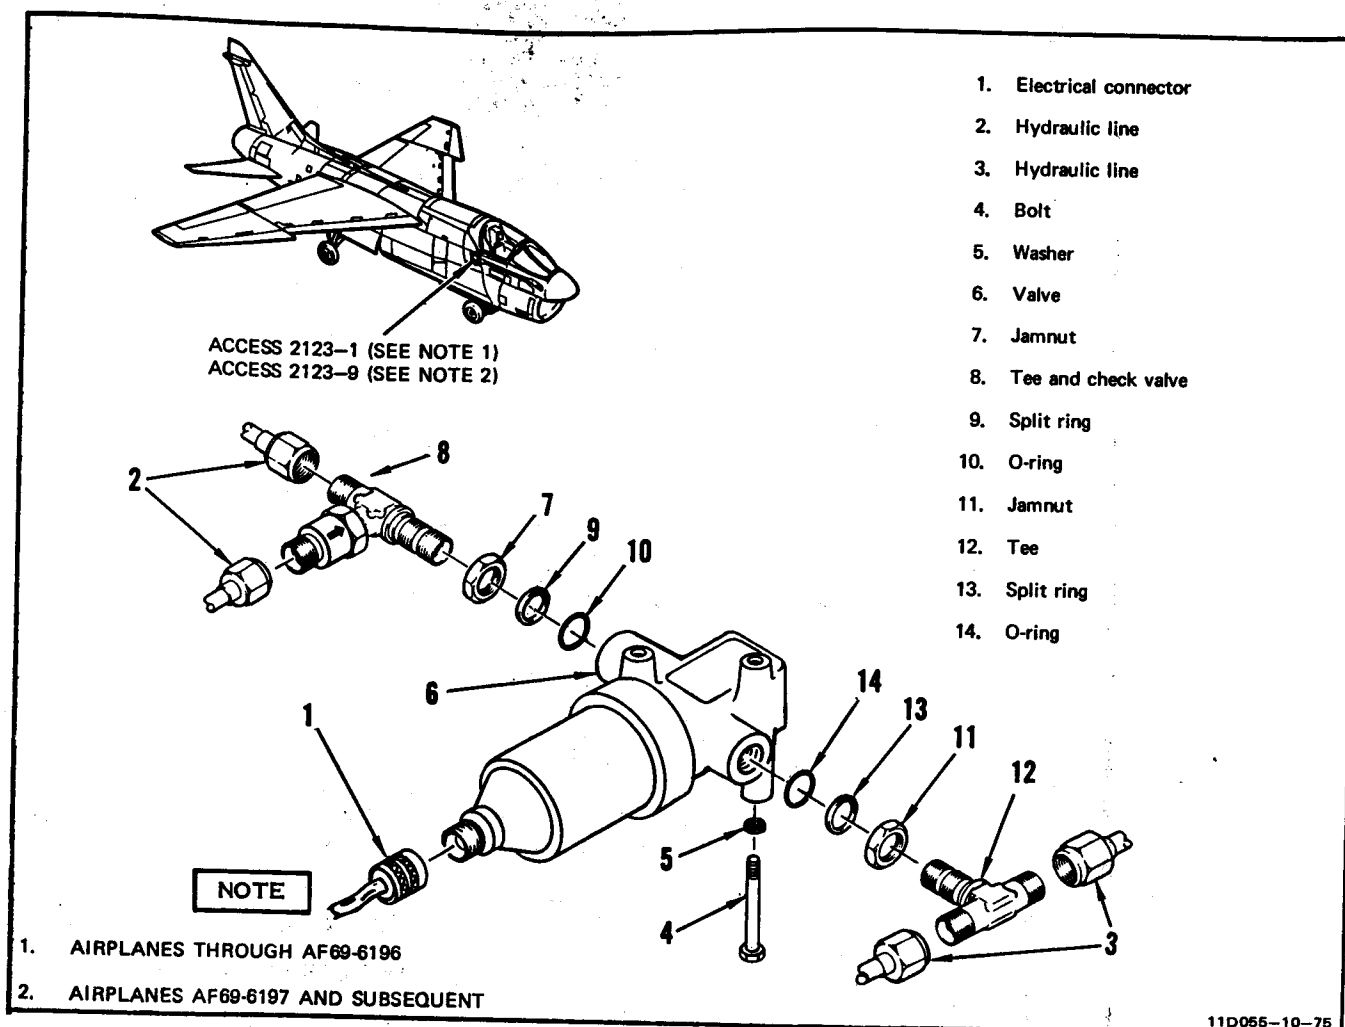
Emergency Power Package Shutoff Valve Removal and Installation
